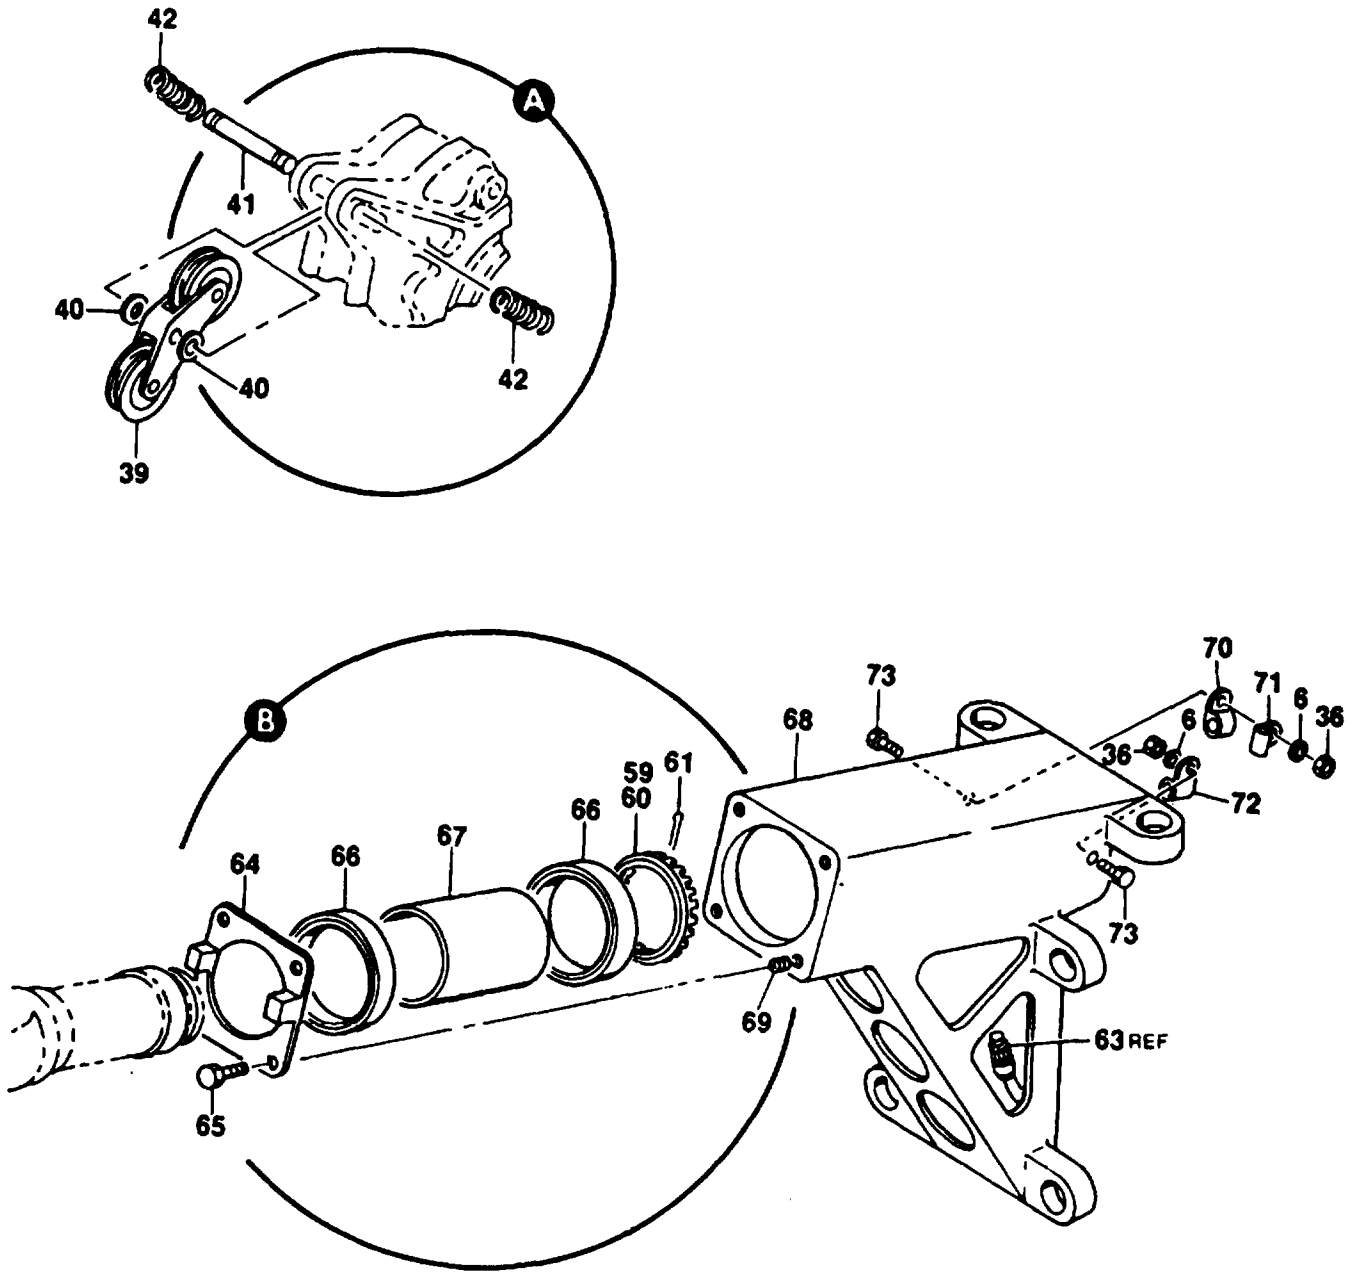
BOOM HEAD ASSY (SHEET 2 OF 4)
